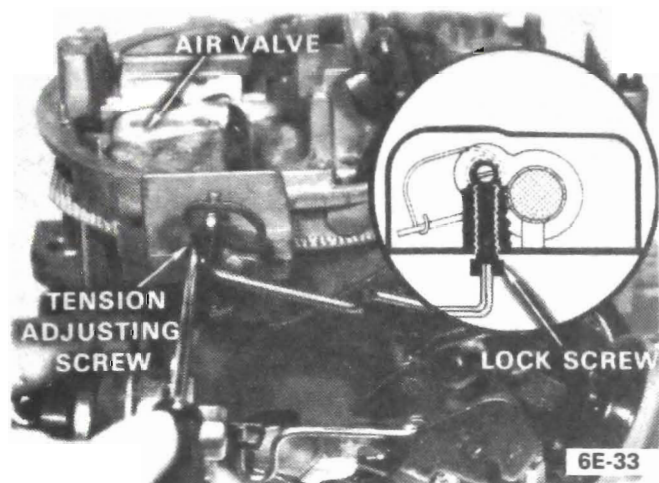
E-33 - Air Valve Spring Wind-Up Adjustment
